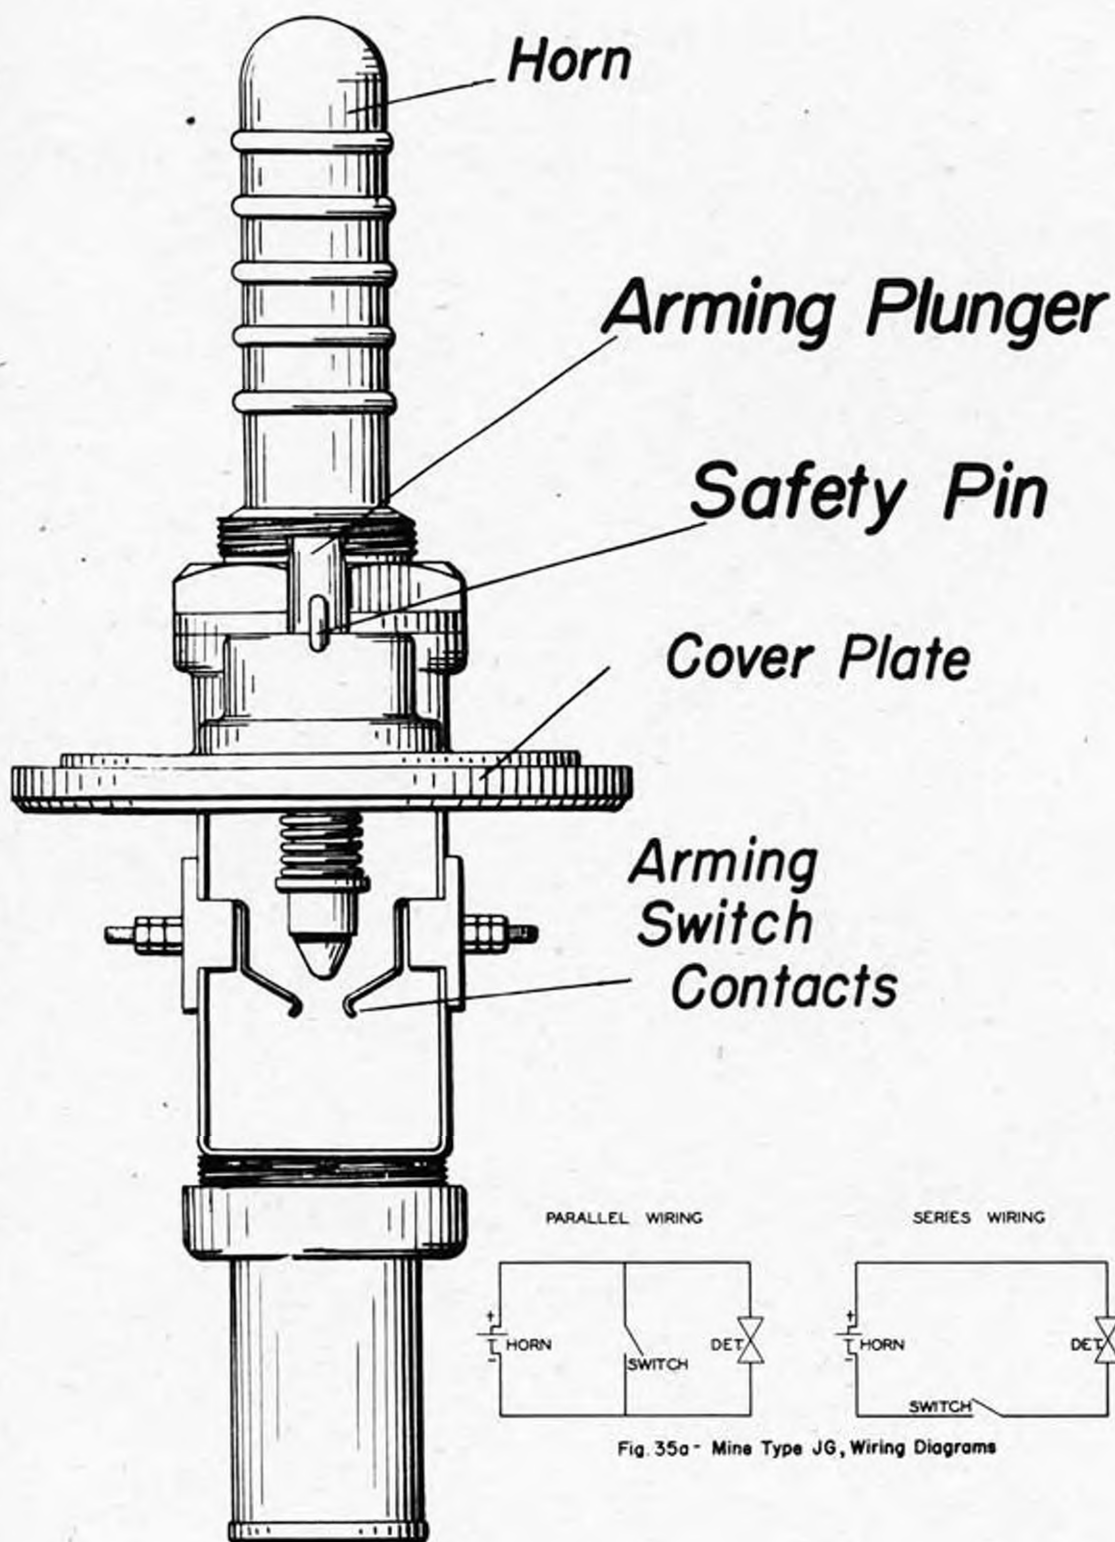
Arming Switch and Firing Assembly, Mine Type JG
